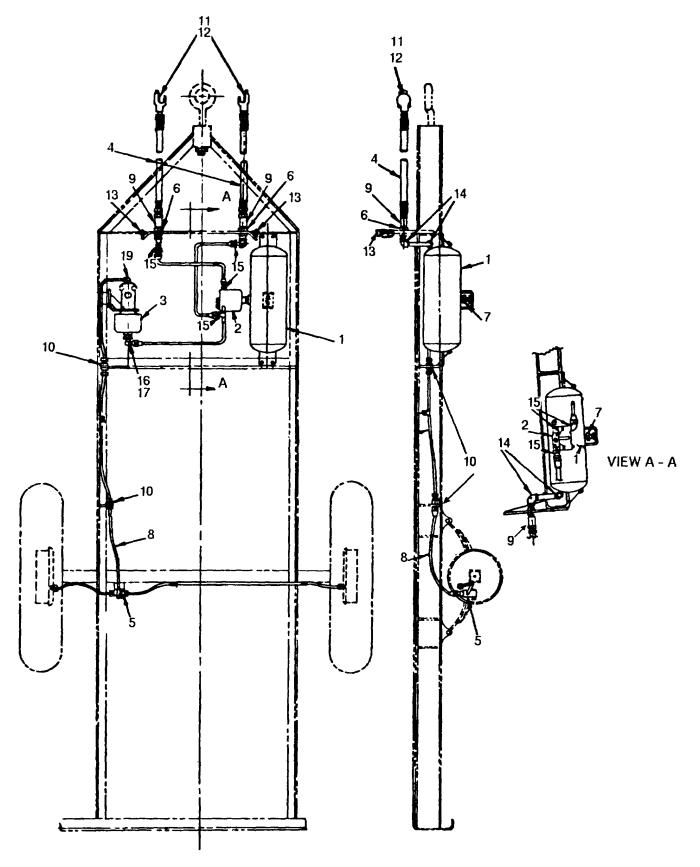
AIR/HYDRAULIC BRAKE ASSEMBLY
